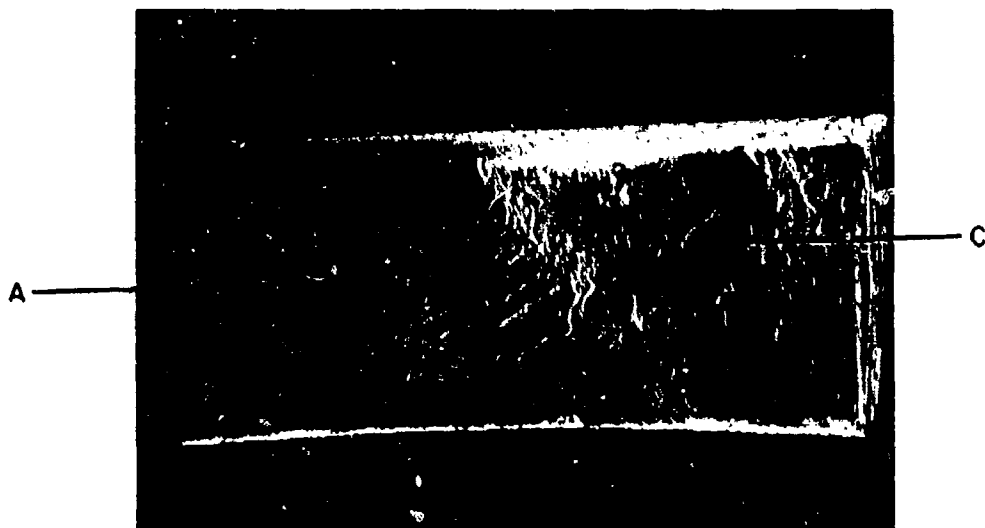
Tensile fracture surface of a hydrogen-embrittled A-514 weld specimen, 25x.
